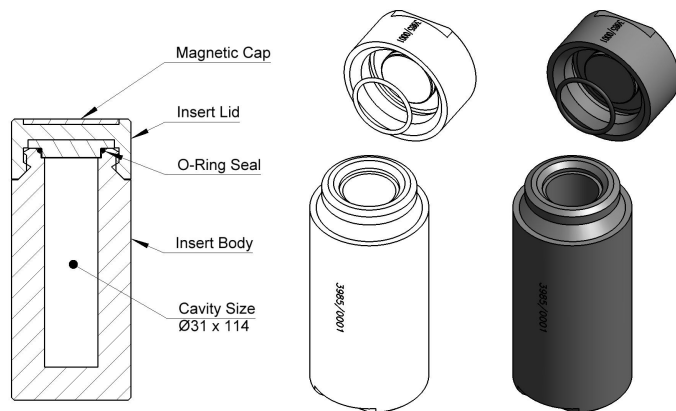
Shielding insert HS-31x114-Tu – Design # 3985
